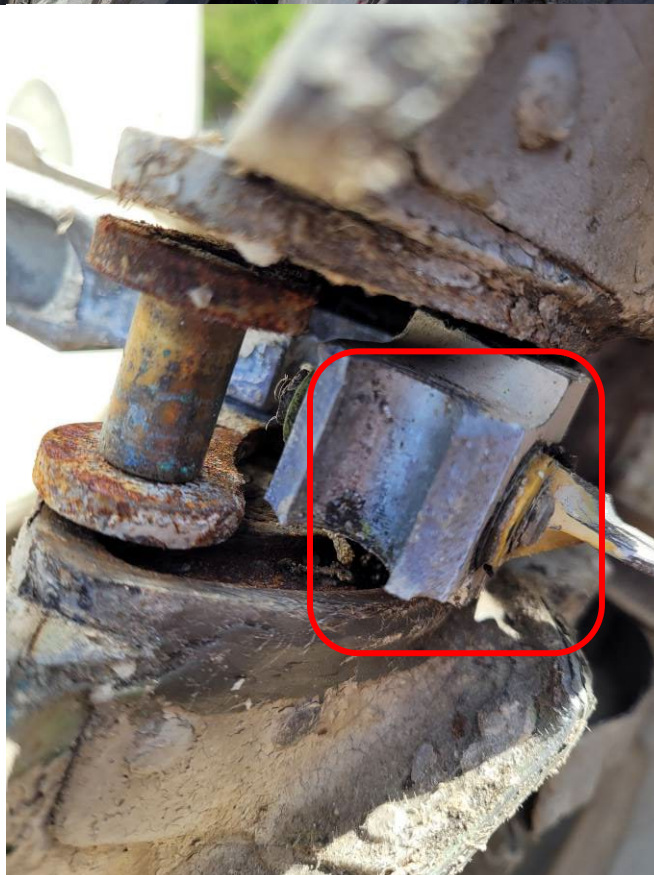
Left Forward Entry Door upper hinge mechanism fracture (Boeing photo)
